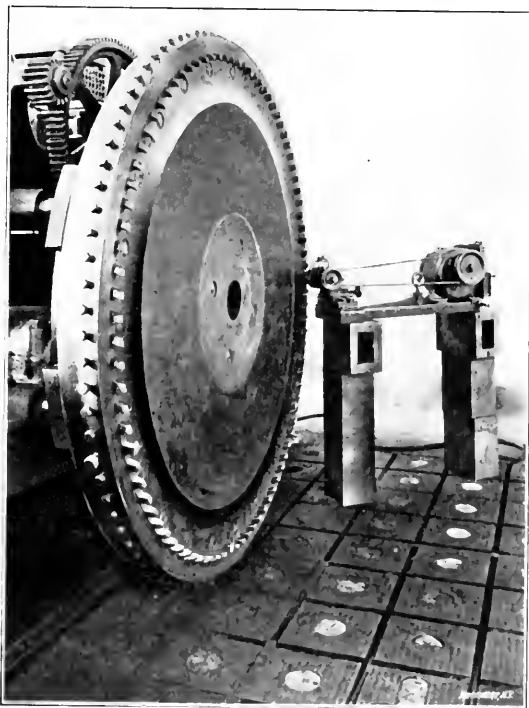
Grinding the Teeth of a Rotary Planer Head
